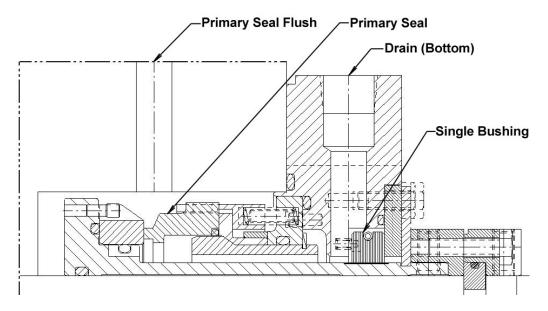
Typical single pipeline mechanical seal with bushing for secondary containment
